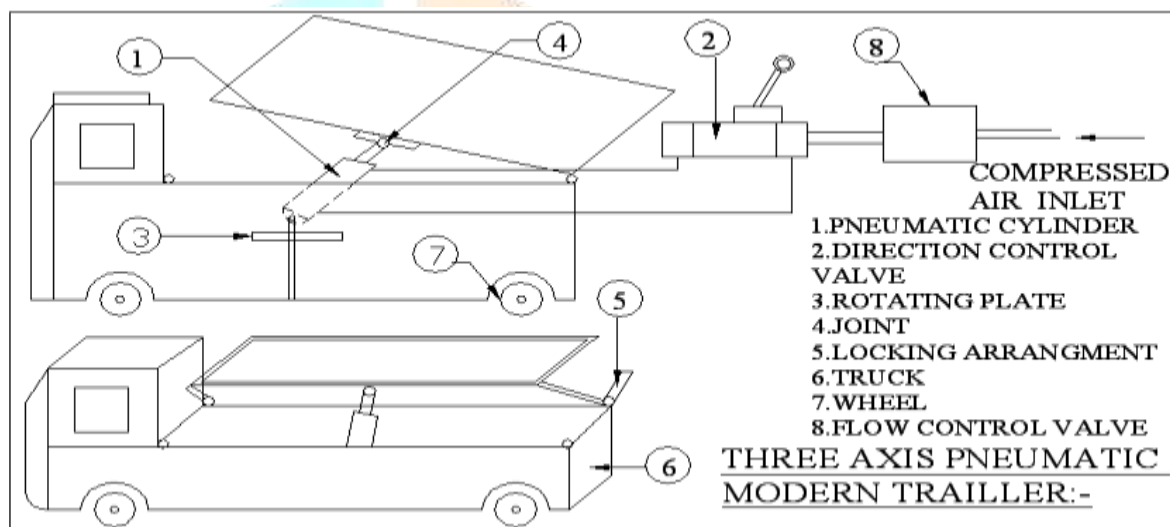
2D Drawing of Three Axis Pneumatic Trailer
